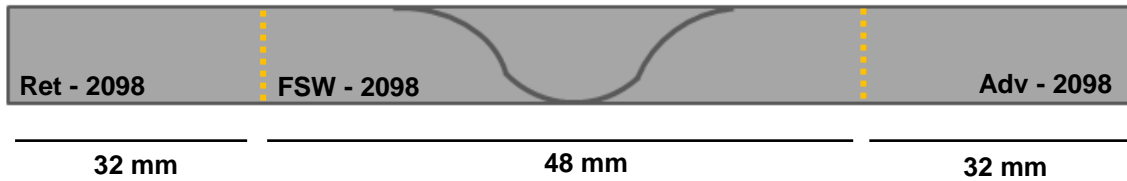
Schema of welded samples crop used in the exfoliation test according to ASTM G34.
